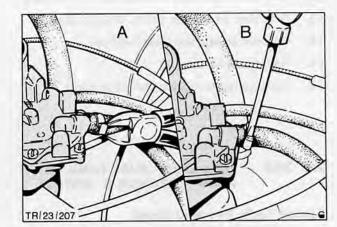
Disconnecting and reconnecting carburrettor supply pipe
